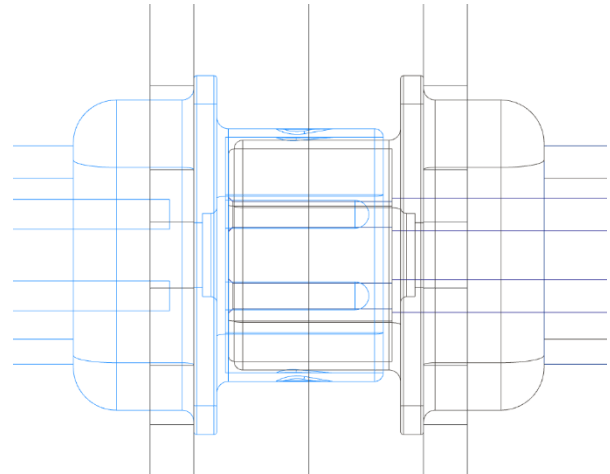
a wireframe close up view of the mating D-Sub connector. The male connector is highlighted blue. Arrows will be used to point out the beginning and end of the connectors and sockets.
